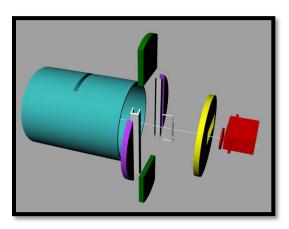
Exploded view of 1 side of the Velocity Reduction System
